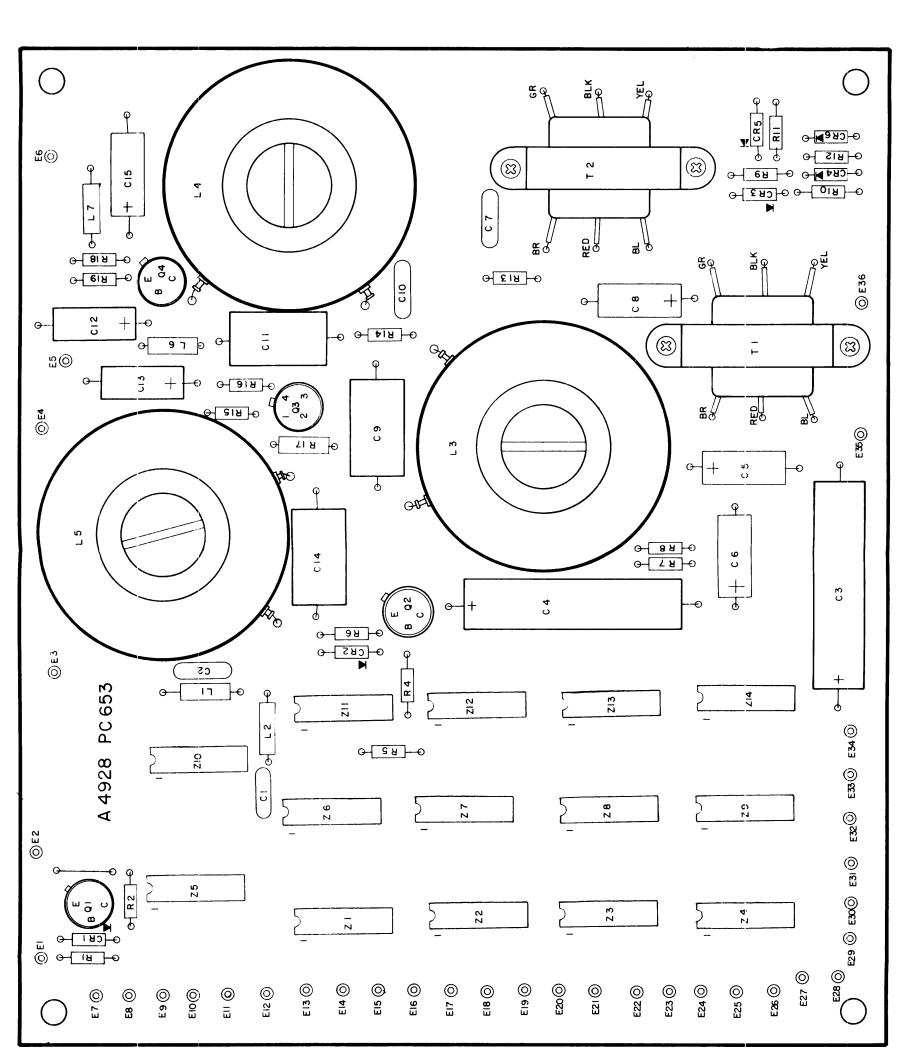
Third Mixer Assembly Z106, Component Location and Parts List
